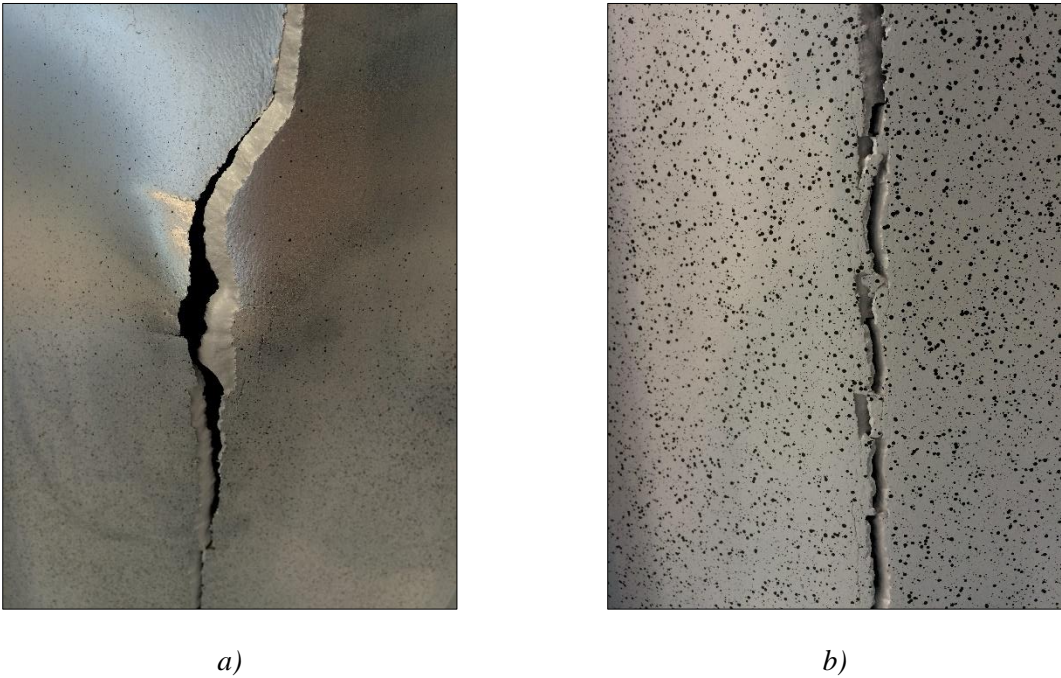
Fracture in a) QSLE2 and b) QSLE1
